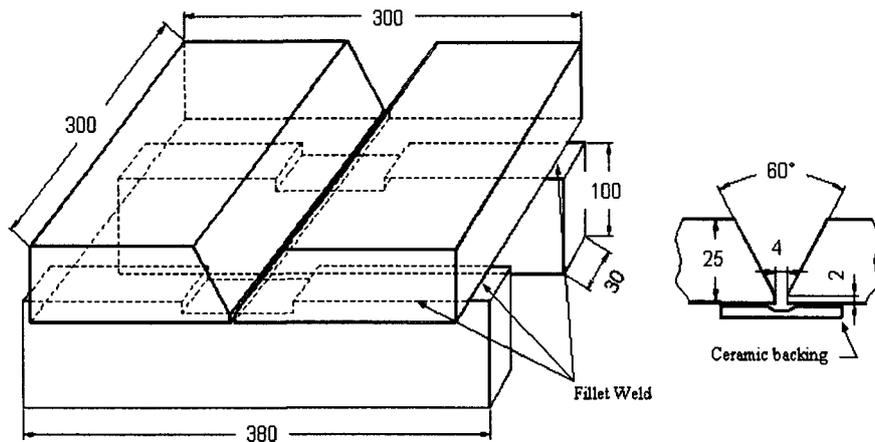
Geometry of restraint weld cracking test specimen.
